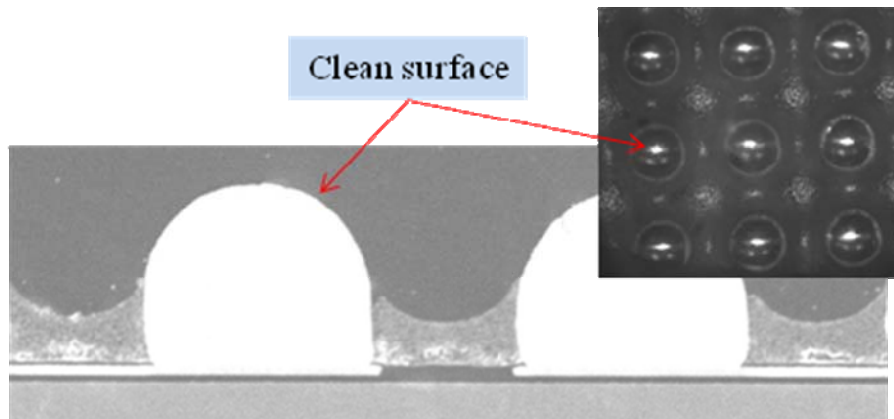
SolderBrace Material cleaned by UV-Defined Method
